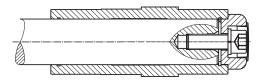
Gear unit mounted to shaft without a shoulder using the fastening element
